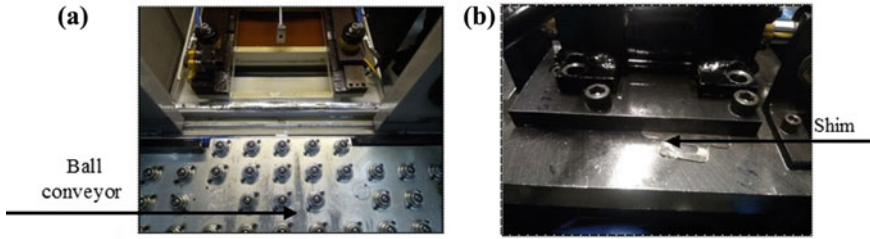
a Ball conveyor and base of test stand b shim addition
